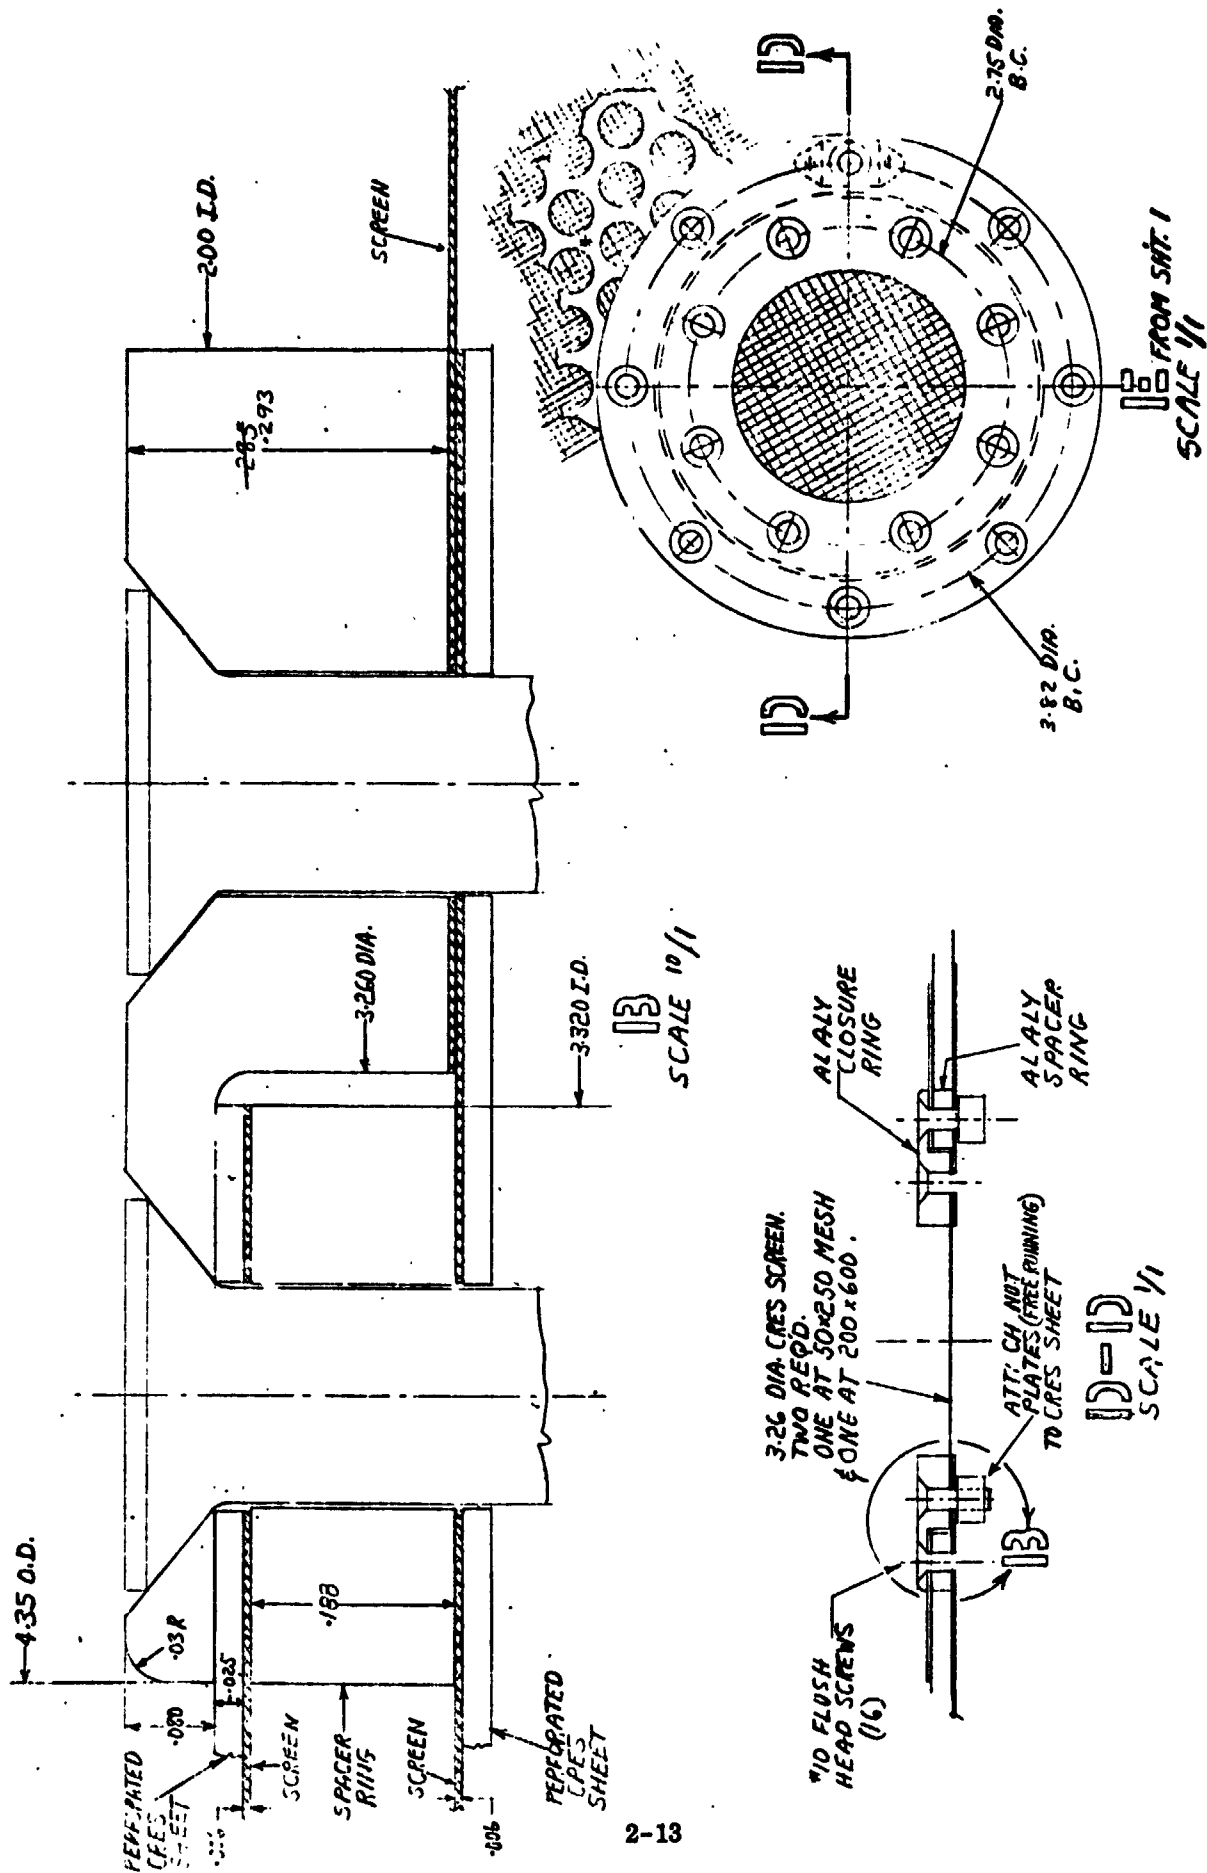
Inner Basket Assembly/Refilling Test Apparatus (Sheet 3 of 5)
